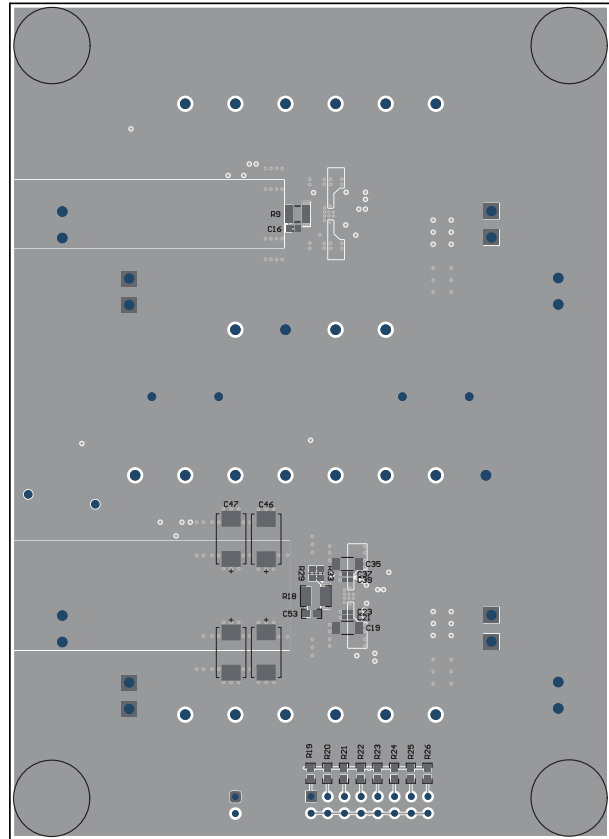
Bottom-Side Composite View (Viewed From Bottom)
